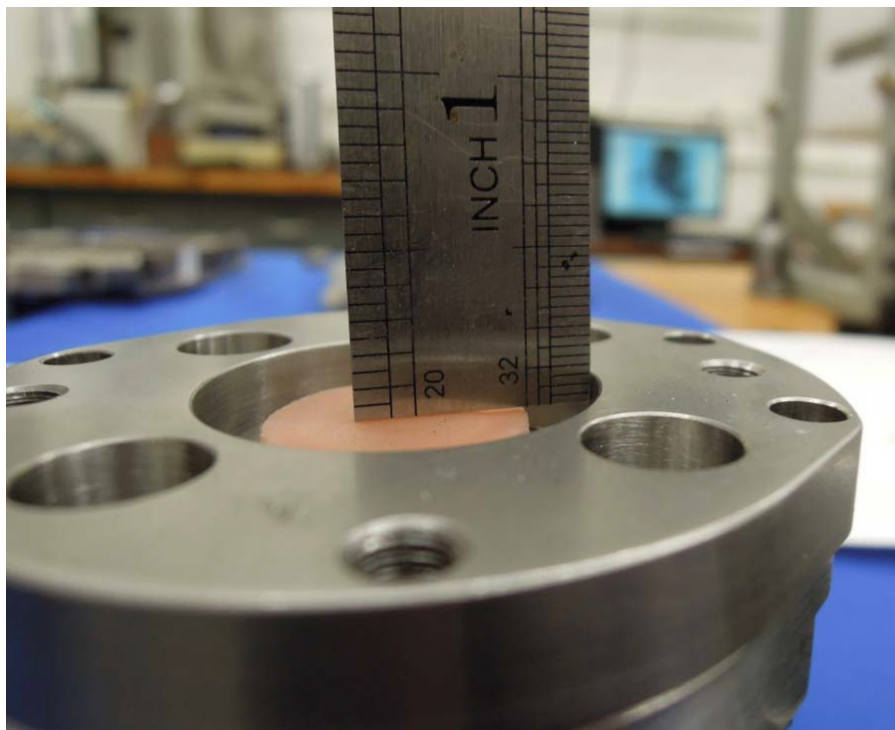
Revised Final Rule cable design. Lower stack height of the cable assembly results in clearance relative to the neck-torso interface plate.
